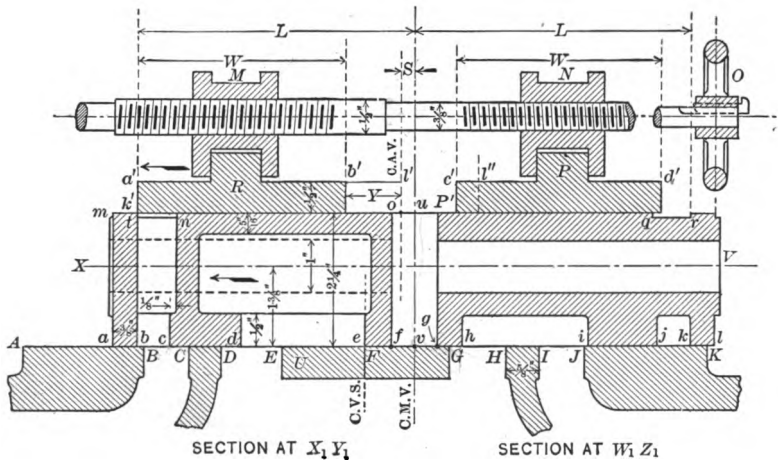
LONGITUDINAL SECTION, MEYER VALVE AND VALVE SEAT
